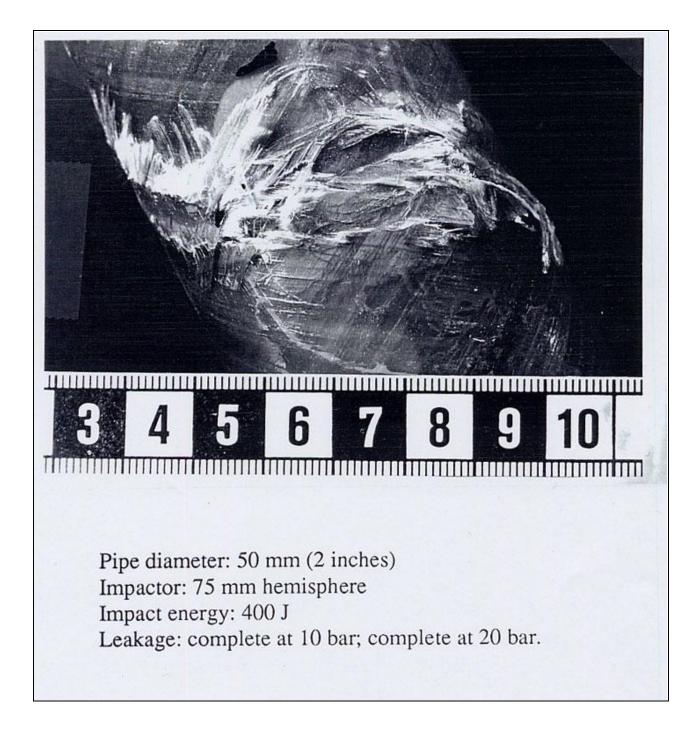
Fracture. GRP pipe ruptured (by severe impact)
